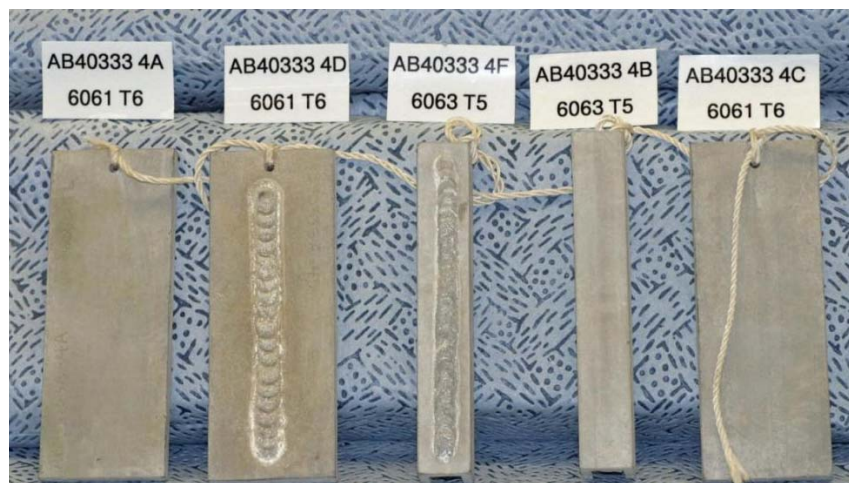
As-received condition of the furniture rack coupons removed from L Basin in 2011
